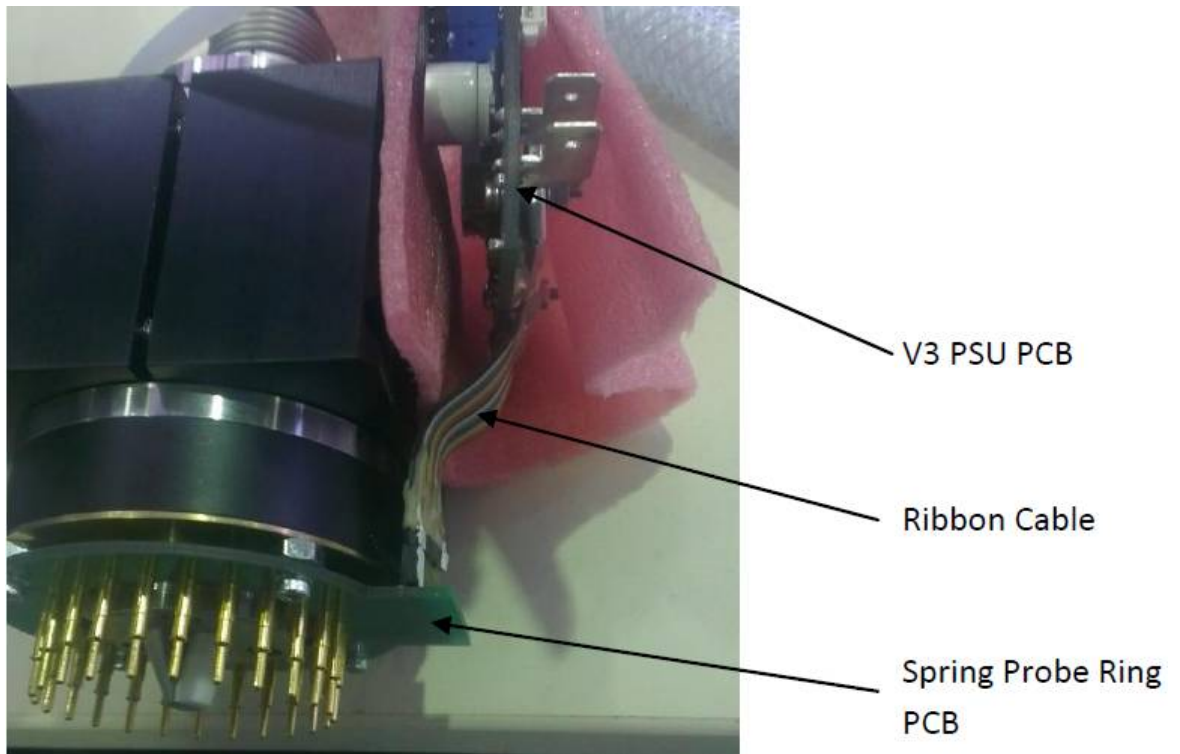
Pulse PSU mounting and connection to the PCB ring with spring probes
